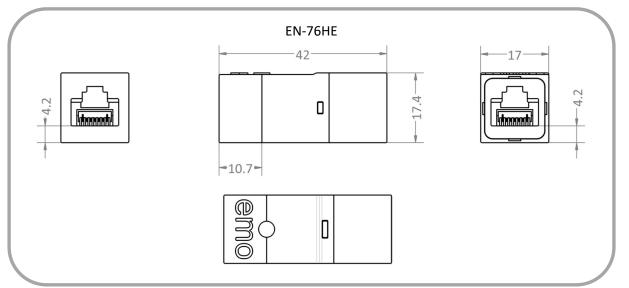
Technical drawings for EN-76HE. All dimensions are in millimetres.
